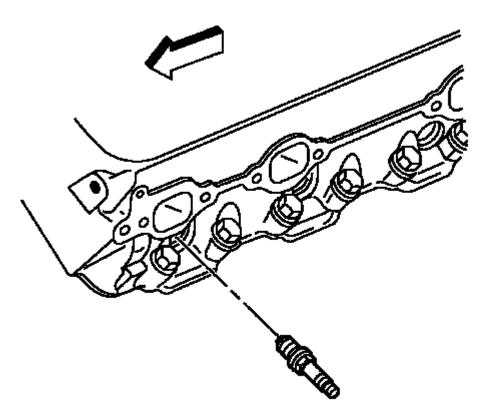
Locating Spark Plug Wire Support Courtesy of GENERAL MOTORS CORP.
